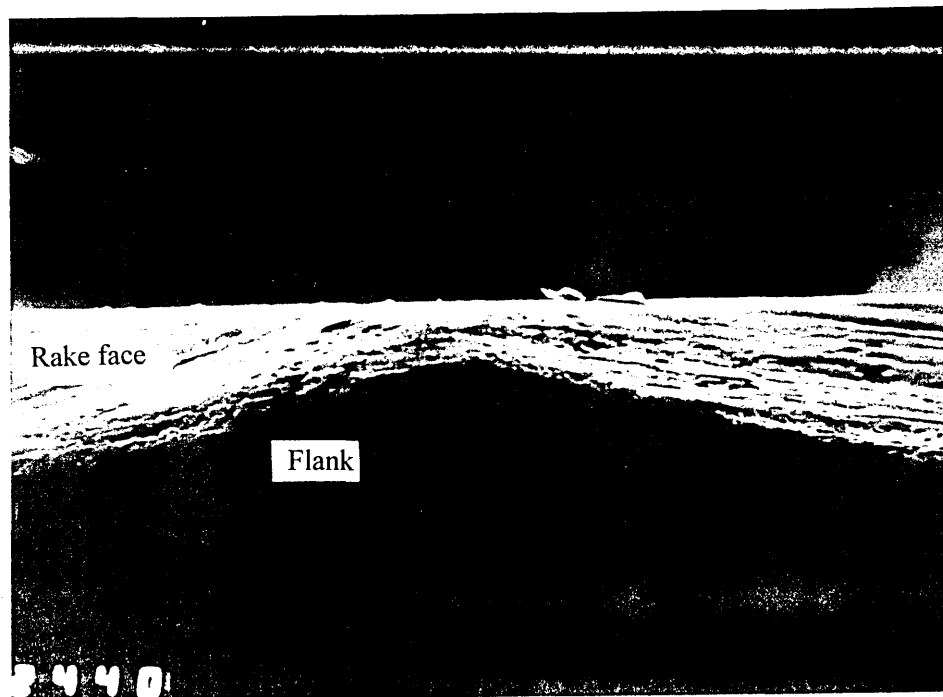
(a) The cutting edge of the finishing tooth of the TiAlN coated
